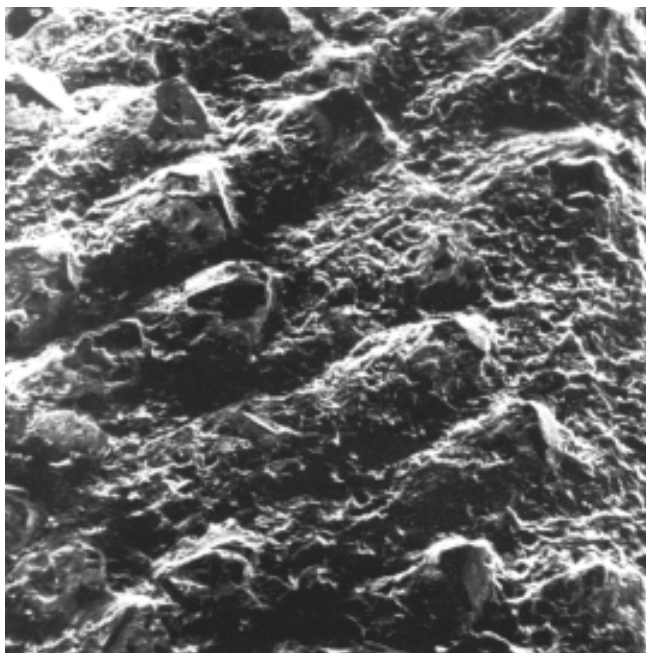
Grinding layer of a synthetic resin bond wheel in new condition.
